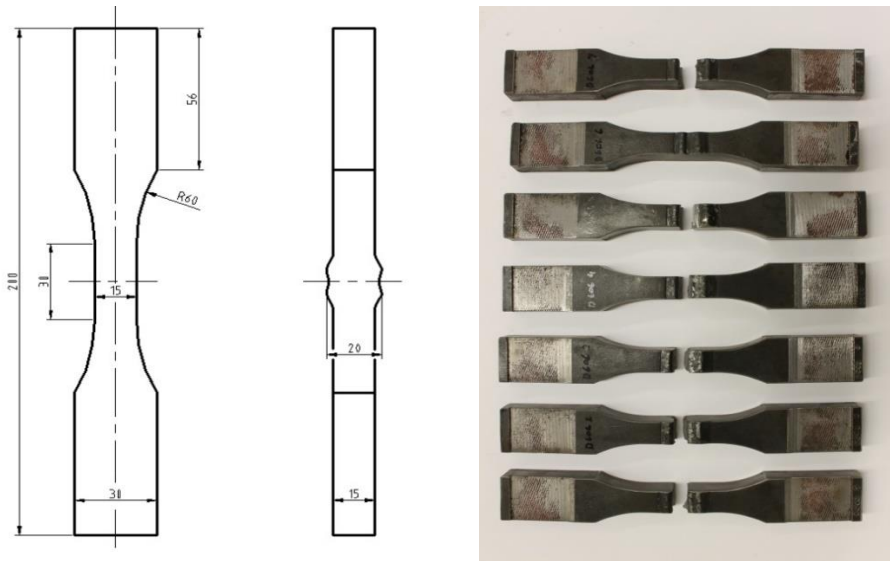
Configuration of the tested specimens (BWJ = butt welded joint)
